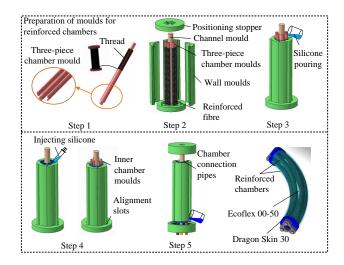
Segment fabrication procedure: Step 1: 3D printing, assembling and wrapping three-piece chamber moulds using fabric thread; Step 2: Assembling all parts of the mould; Step 3: Pouring Ecoflex 00-50 into the mould; Step 4: Removing the three-piece chamber moulds. Injecting Ecoflex 00-50 into the chambers. Insertion of metal pins with a smaller diameter into actuation chambers; Step 5: Integrating actuation pipes, connecting two adjacent chambers, sealing both sides of the segment using Dragon Skin 30.
